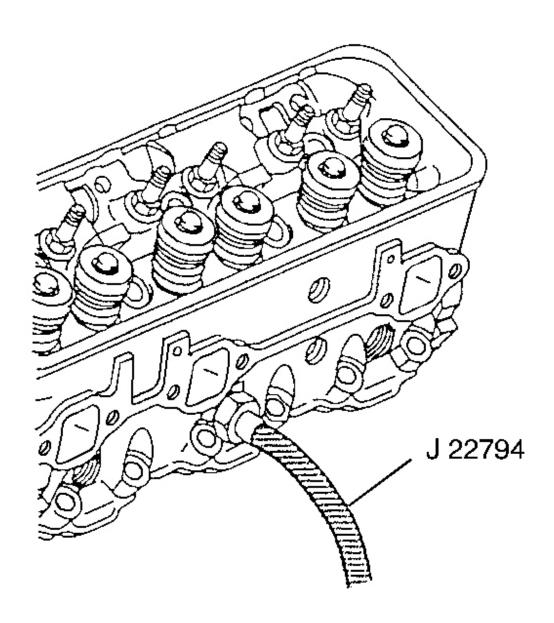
View Of J 22794 Courtesy of GENERAL MOTORS CORP.
